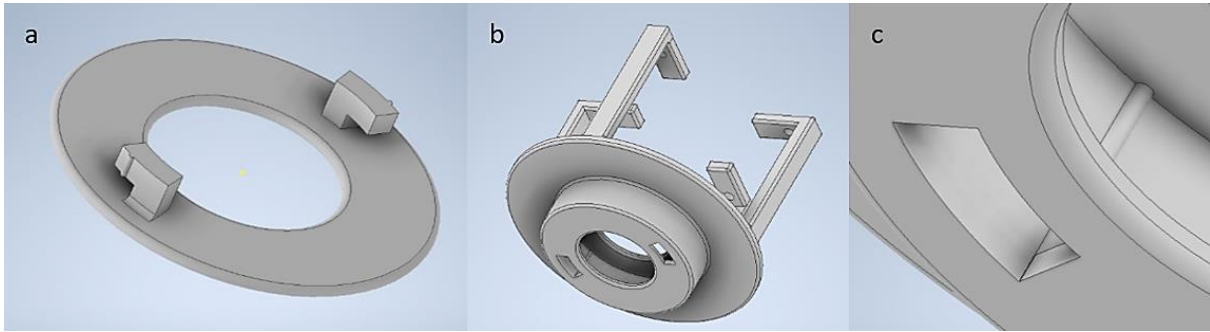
Design 1: Endcap bracket(a), ballast section(b) and closeup ballast section(c)
